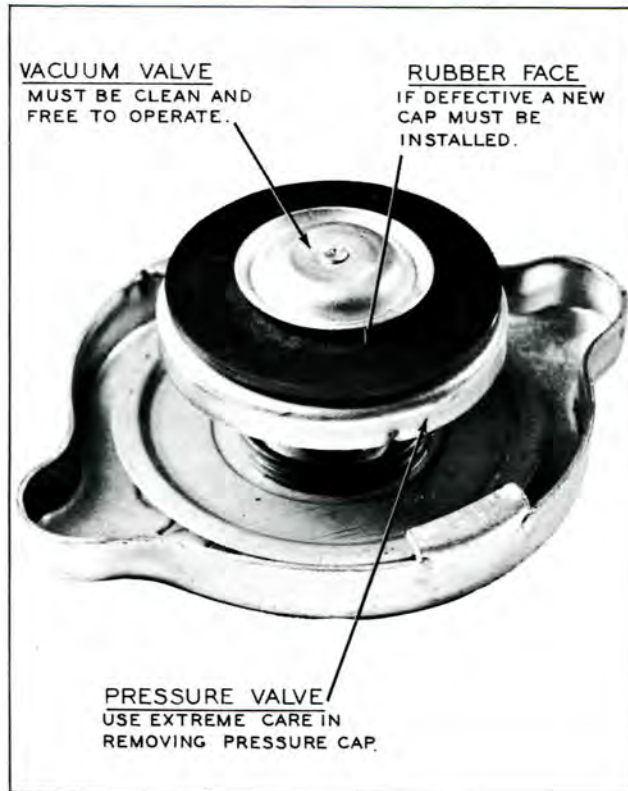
Pressure Cap Gasket, Valve and Valve Gasket
